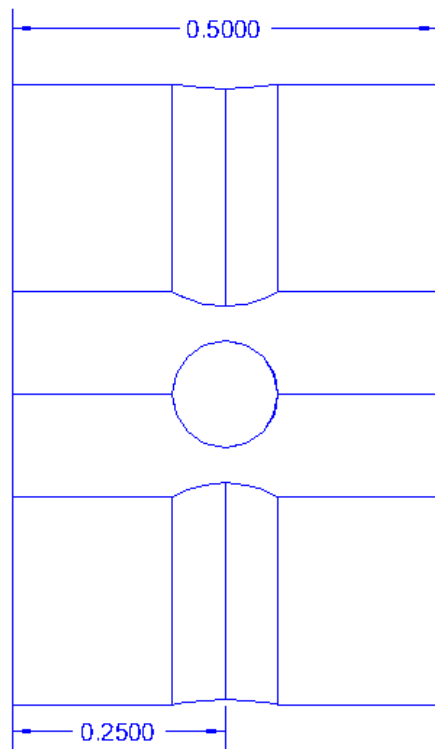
Aluminum Retaining Nut Side View, Dimensions in inches (Misilo III, 2018)
